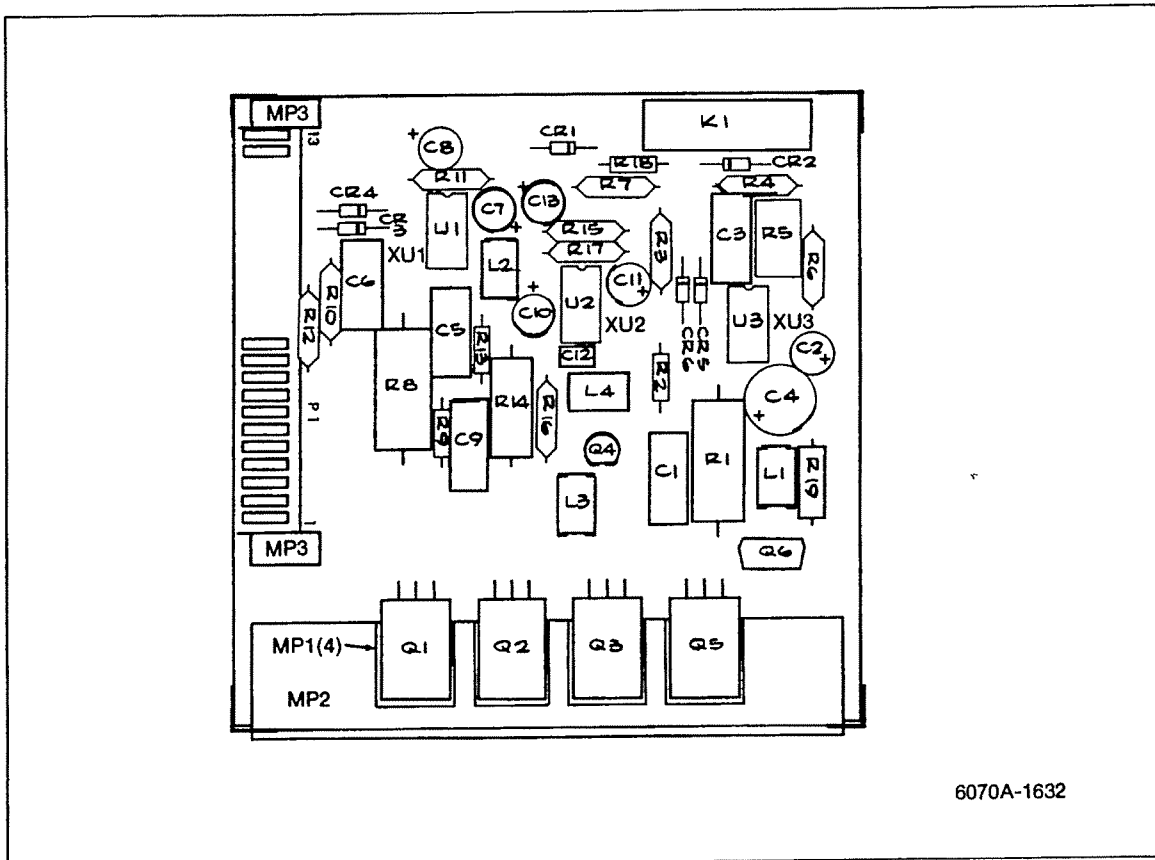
A6A3 +5V Series Pass PCB Assembly
